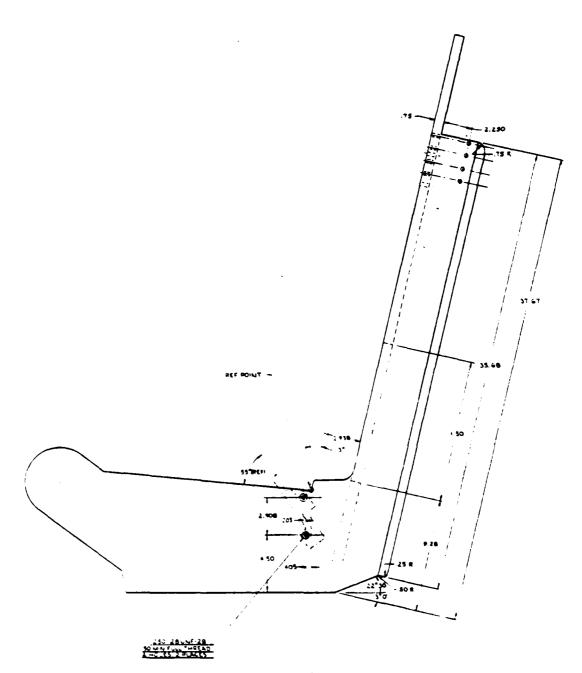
Dimensionalized Drawing of MPES Seat Structure (Side View)
